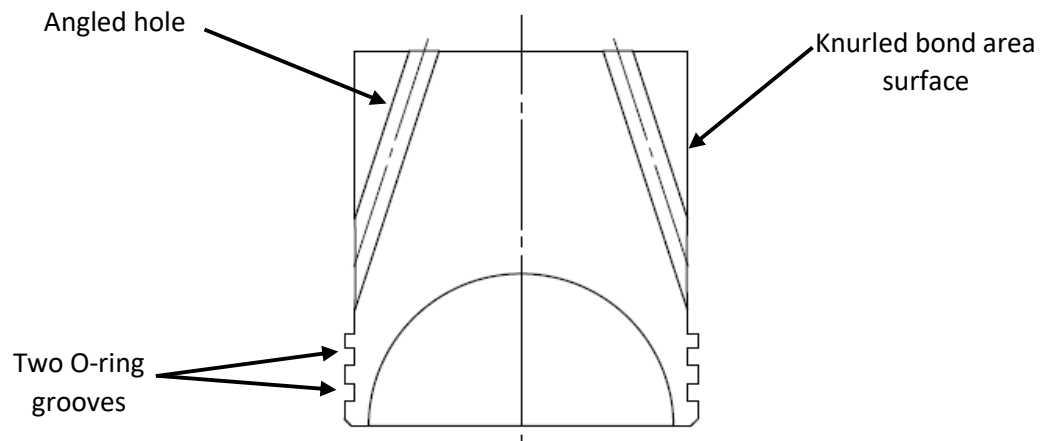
Schematic showing cross-sectional view of the third end cap design with 2 O-ring grooves and a knurled bond area surface
